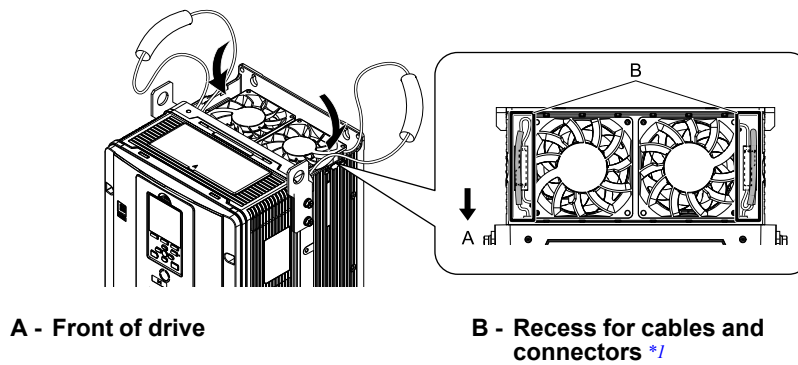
Put the Cables and Connectors in the Drive Recess
